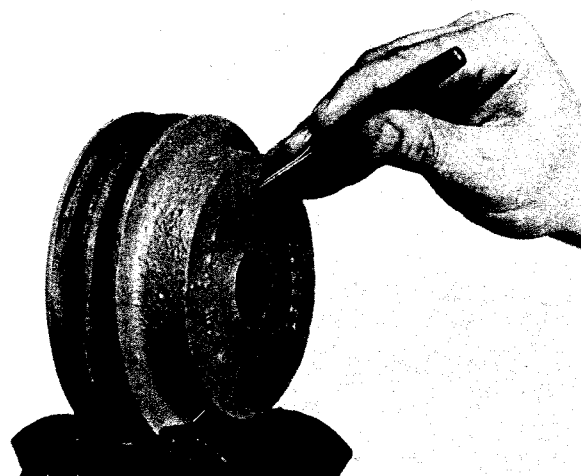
, (N10865). Drive wear sleeve from pulley
